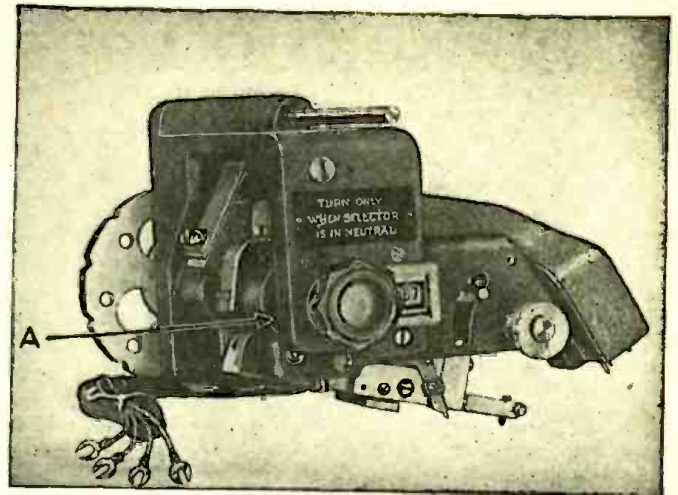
The carriage assembly. Recording head is seen pivoted at A.
